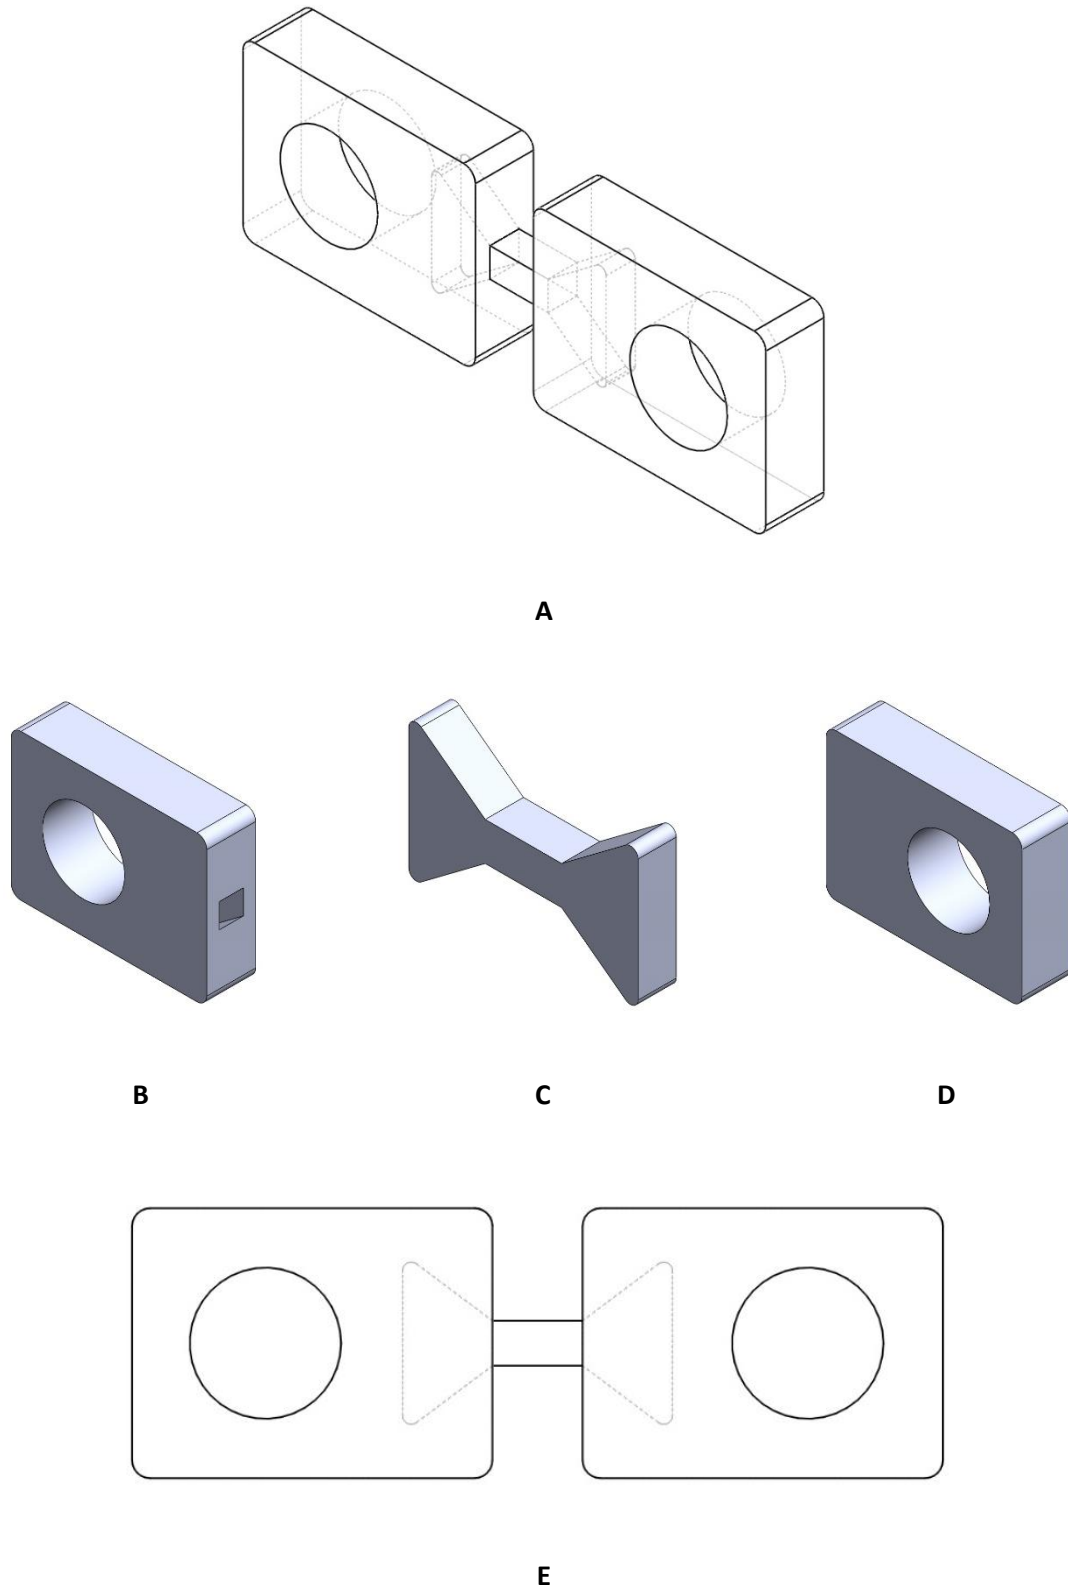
Design of bi-material compliant mechanisms. A. Isometric view of the whole part. B. First clamp. C. A flexible beam with the interface section. D. Second clamp. E. Front view of the mechanism. The dash indicates the interface section inside the clamp. Pictures are not in scale.
